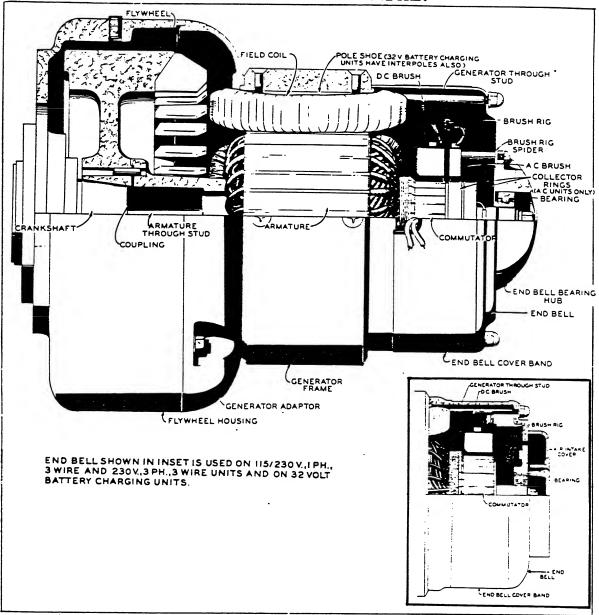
CUTAWAY VIEW OF GENERATOR
